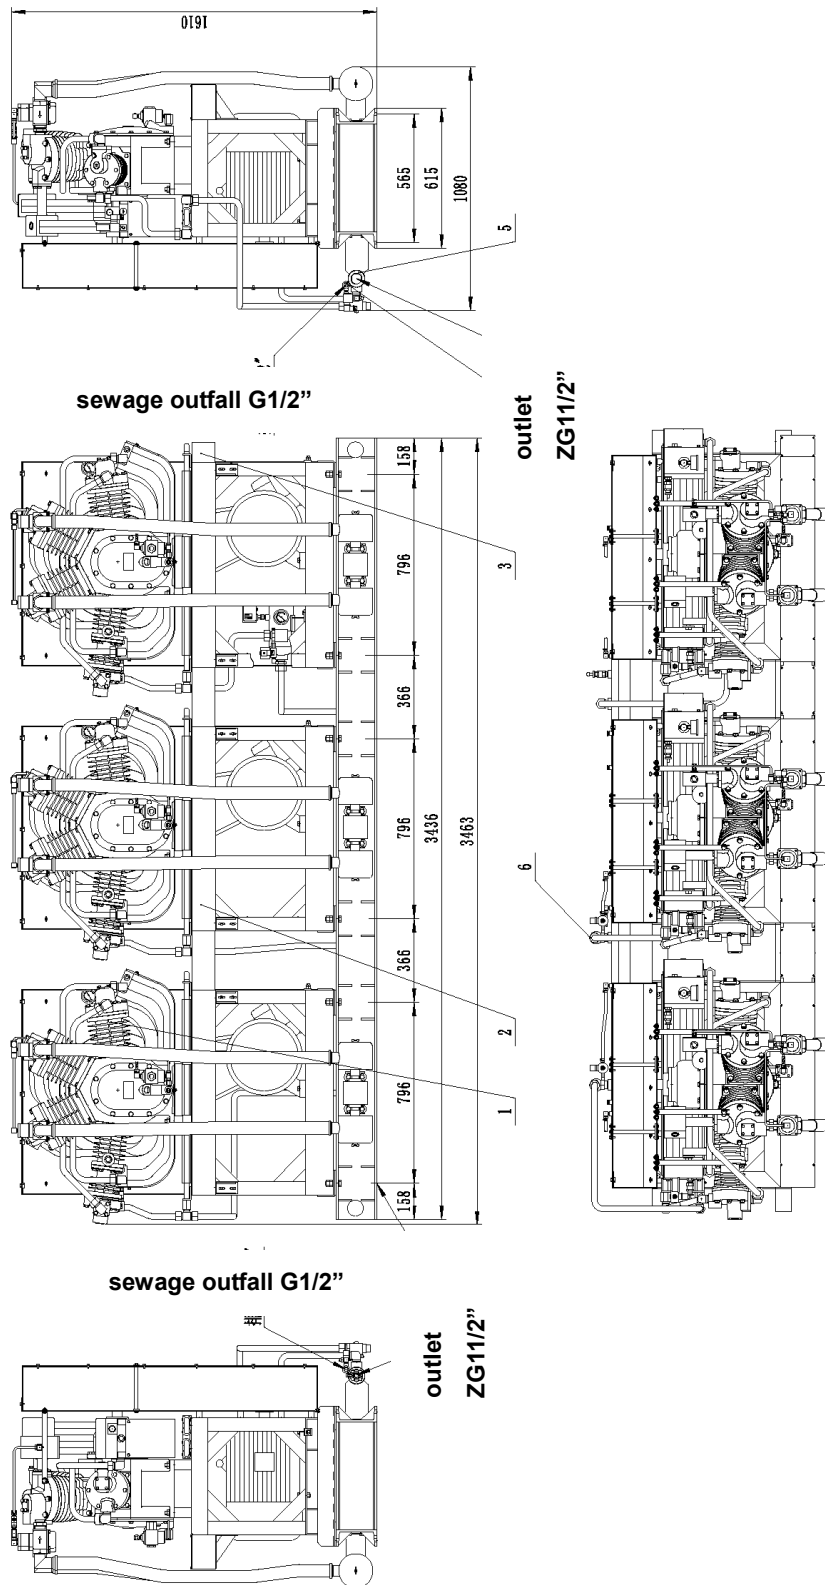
Figure E: Outline Drawing of 09SH Four-Engine Unit (vertical Type)
